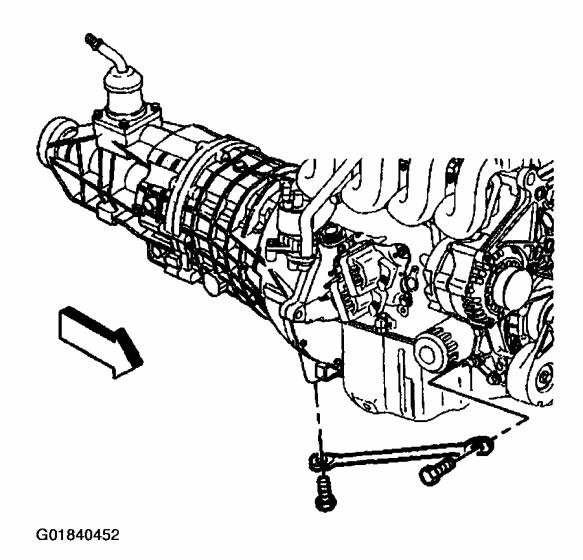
Removing Right Side Transmission-To-Engine Brace
